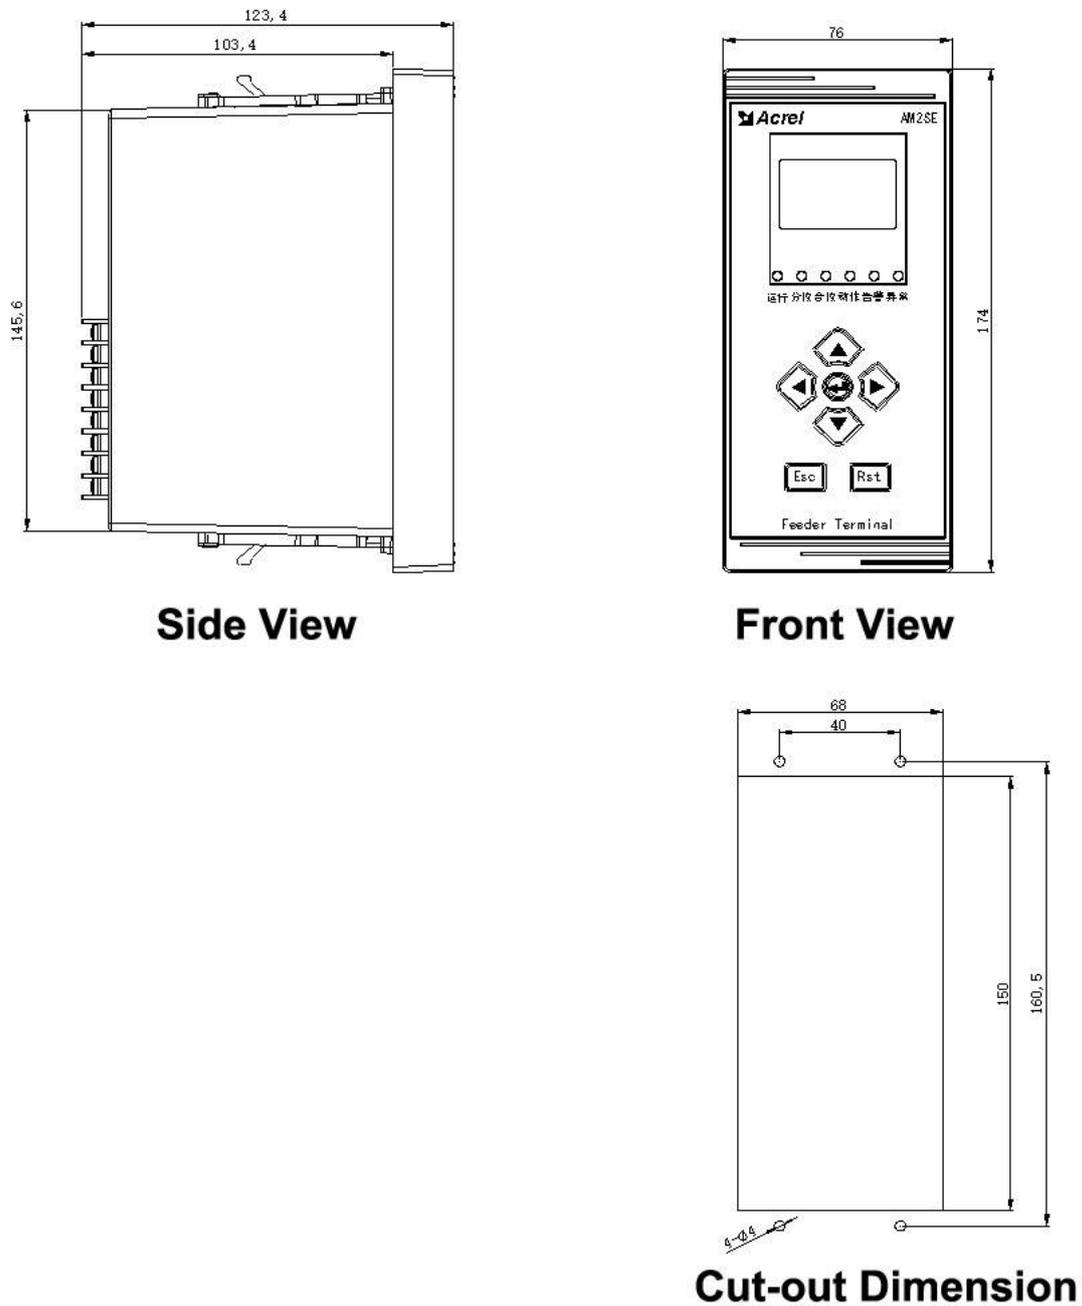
AM2SE-V Dimensions and cut-out dimensions
